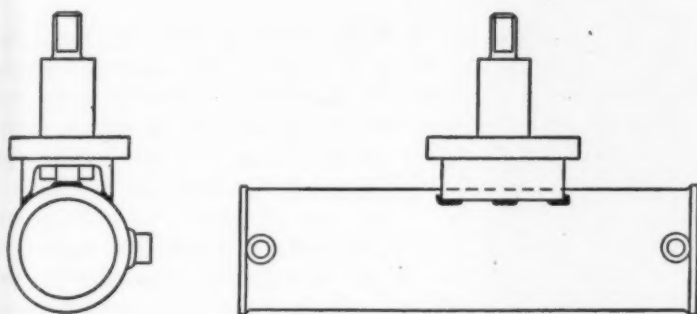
Lift cylinder trunnion bracket showing final welded design
